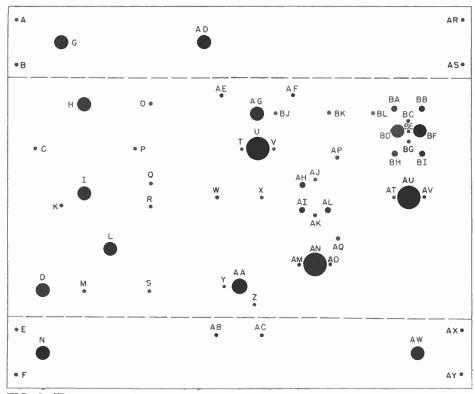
This is your chassis with all the holes identified. Have it in this position to carry out the experiments.
